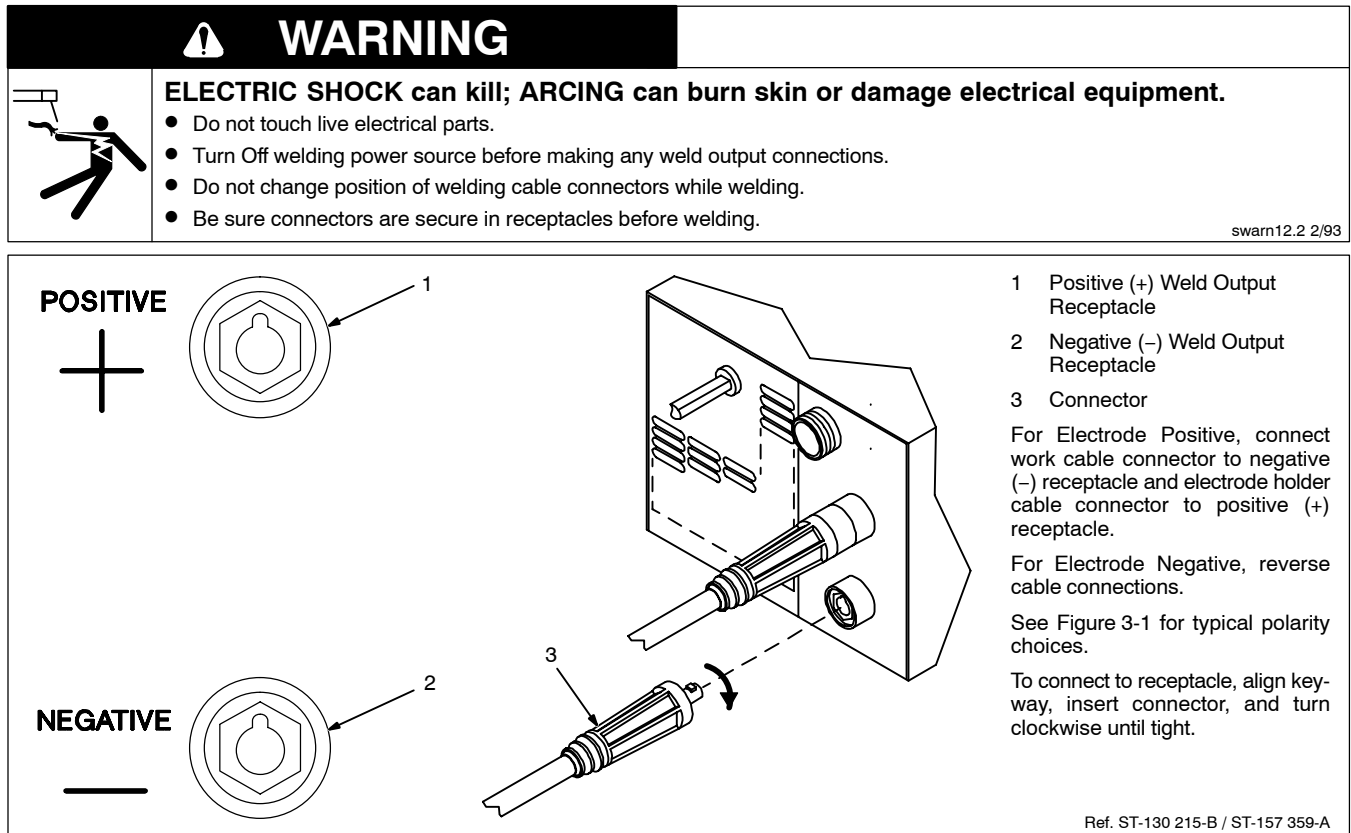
Connecting To Weld Output Receptacles
